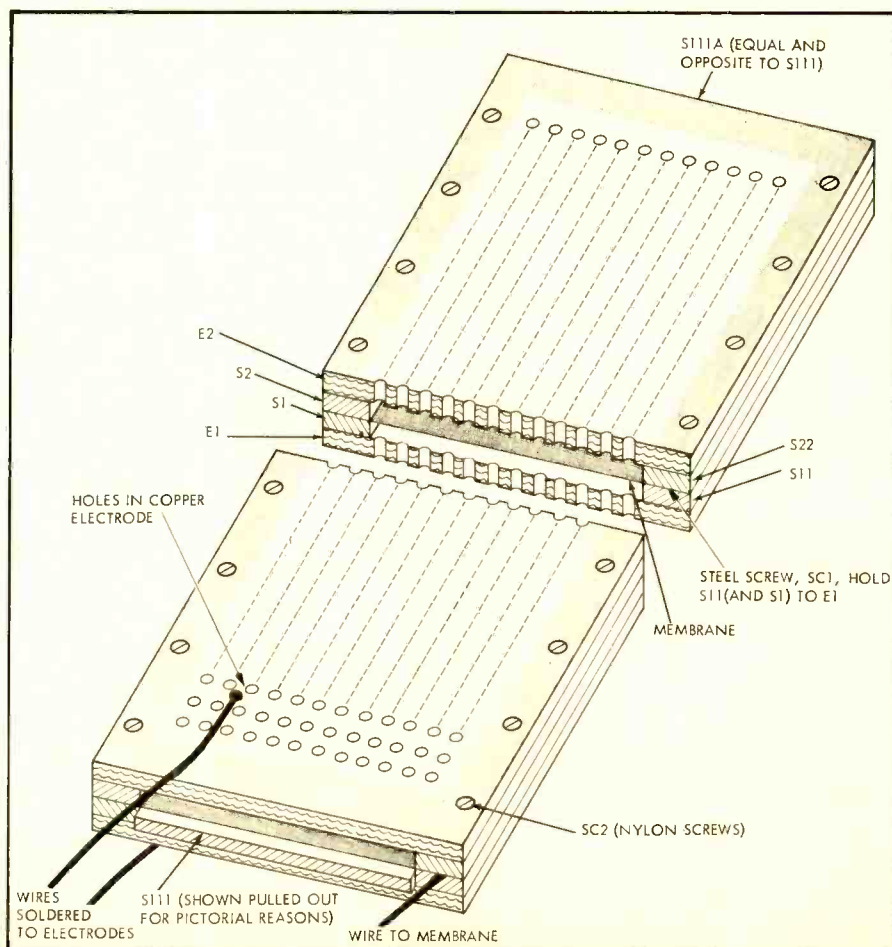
Pictorial representation of assembled speaker unit. Note that the drawing is not to exact scale in order to show the parts more clearly.
